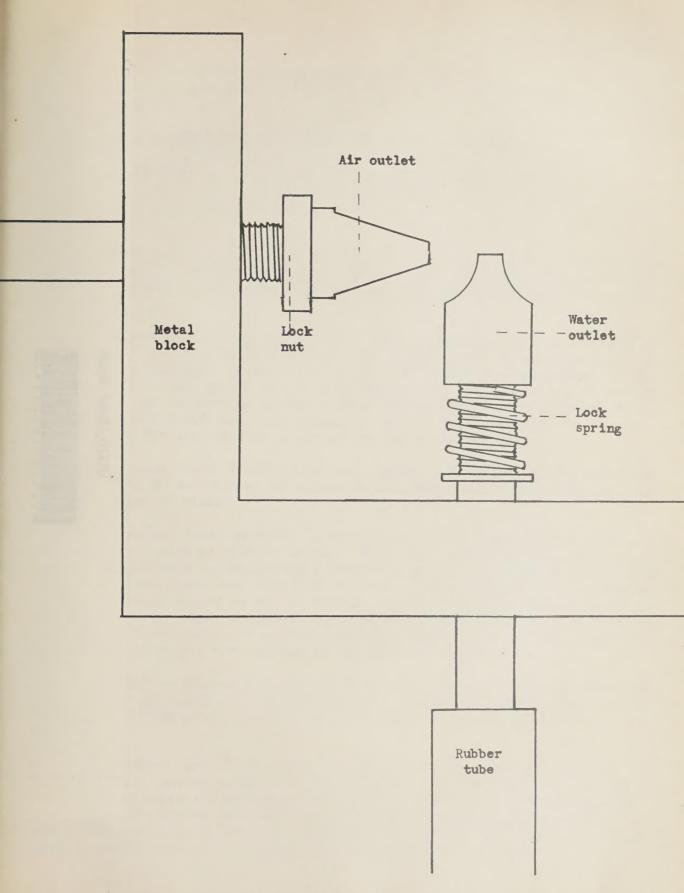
Detail of humidifier tip adjustment (side elevation).
